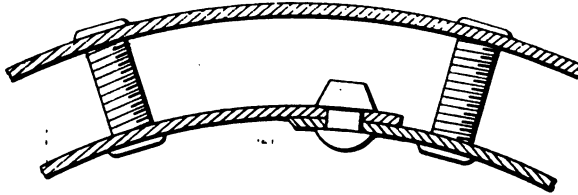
PROPER LOCATION OF STAYBOLTS ADJACENT TO LONGITUDINAL JOINT IN FURNACE SHEET
